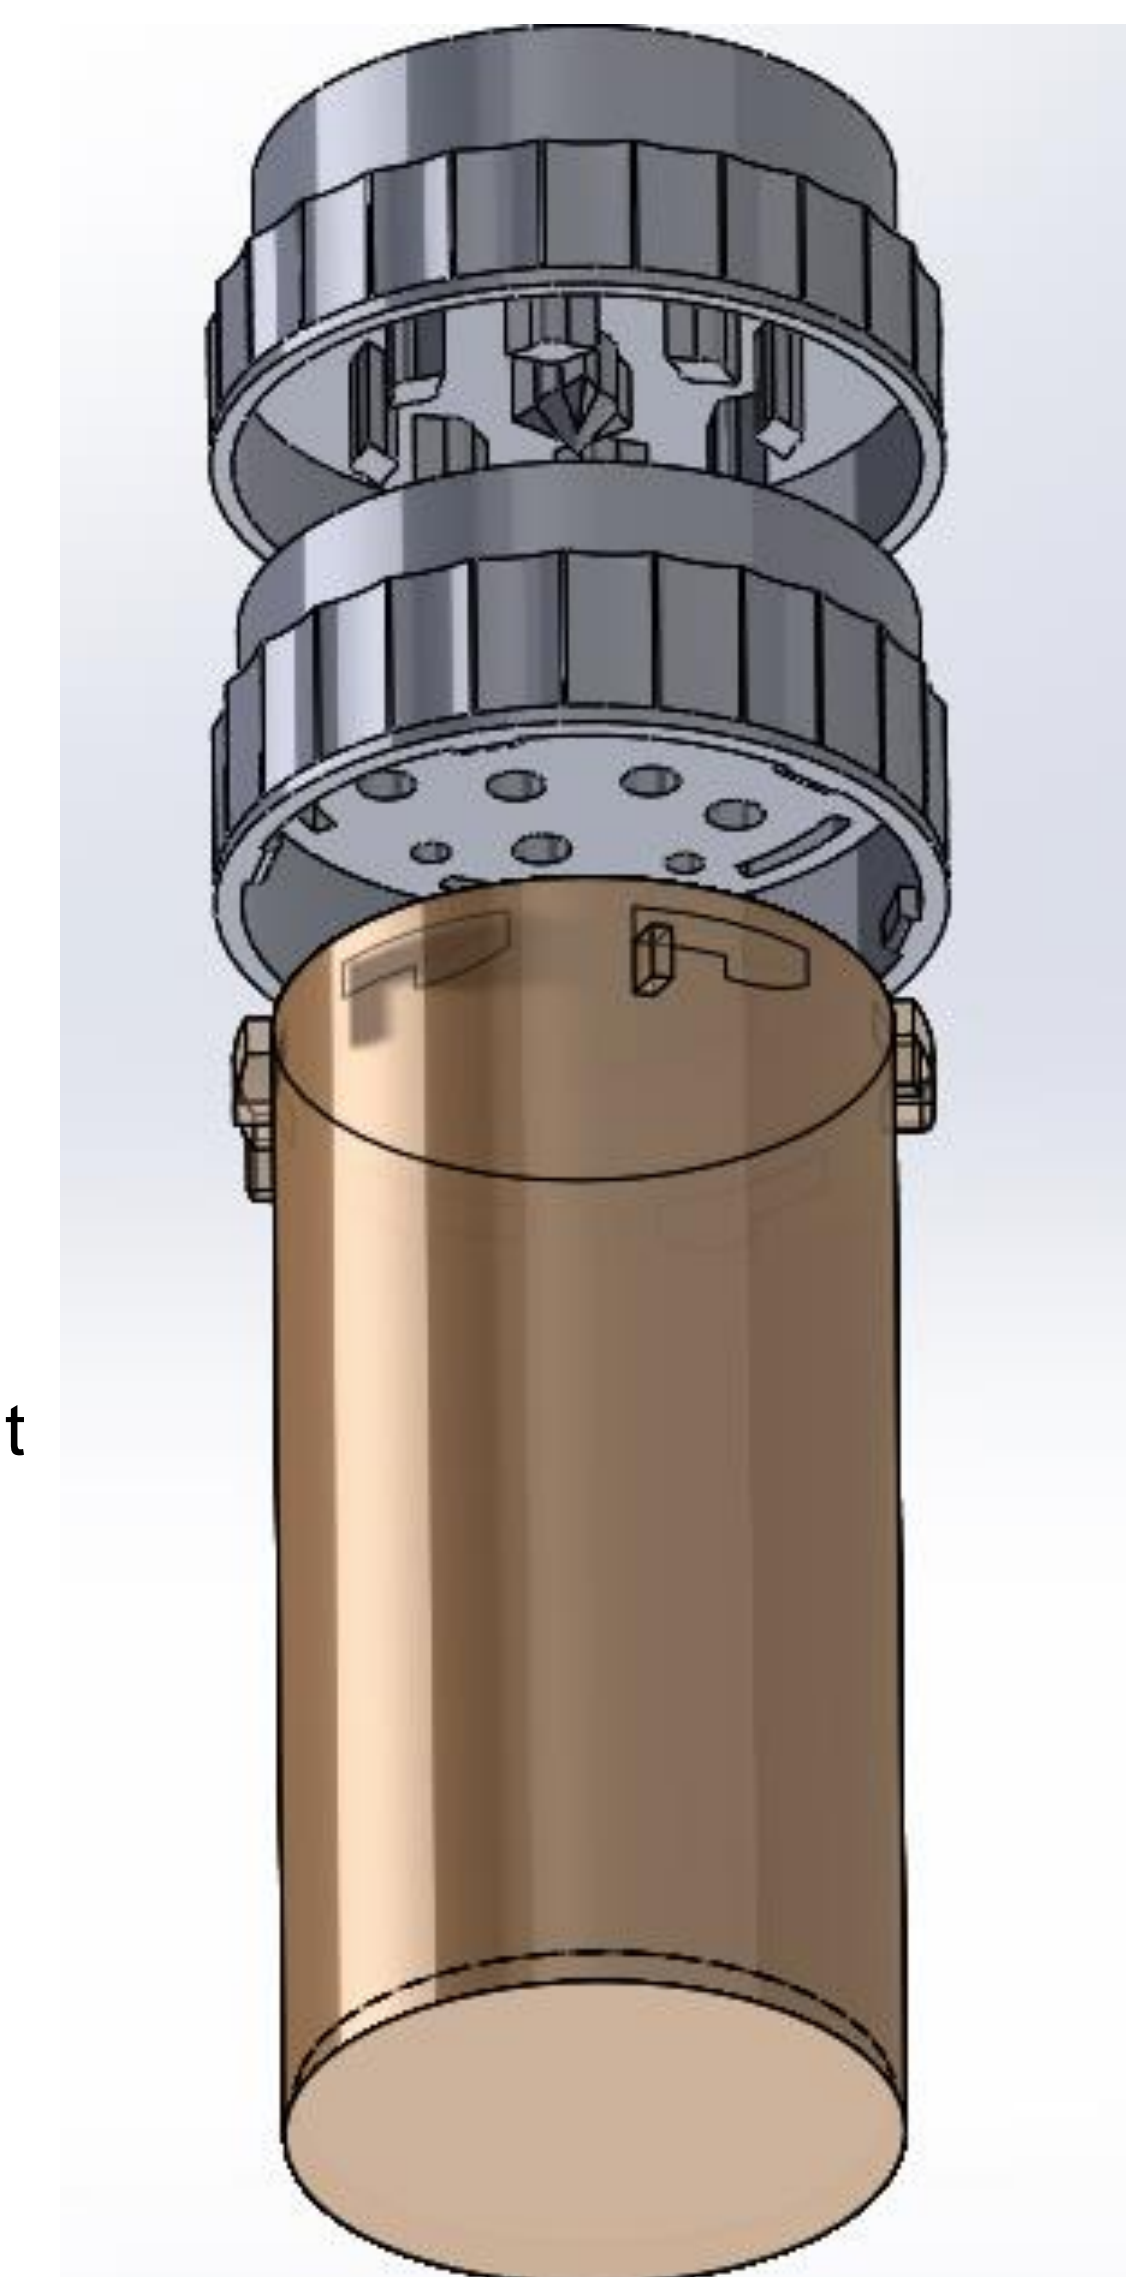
Expanded view of cap attachment to standard prescription pill bottle
